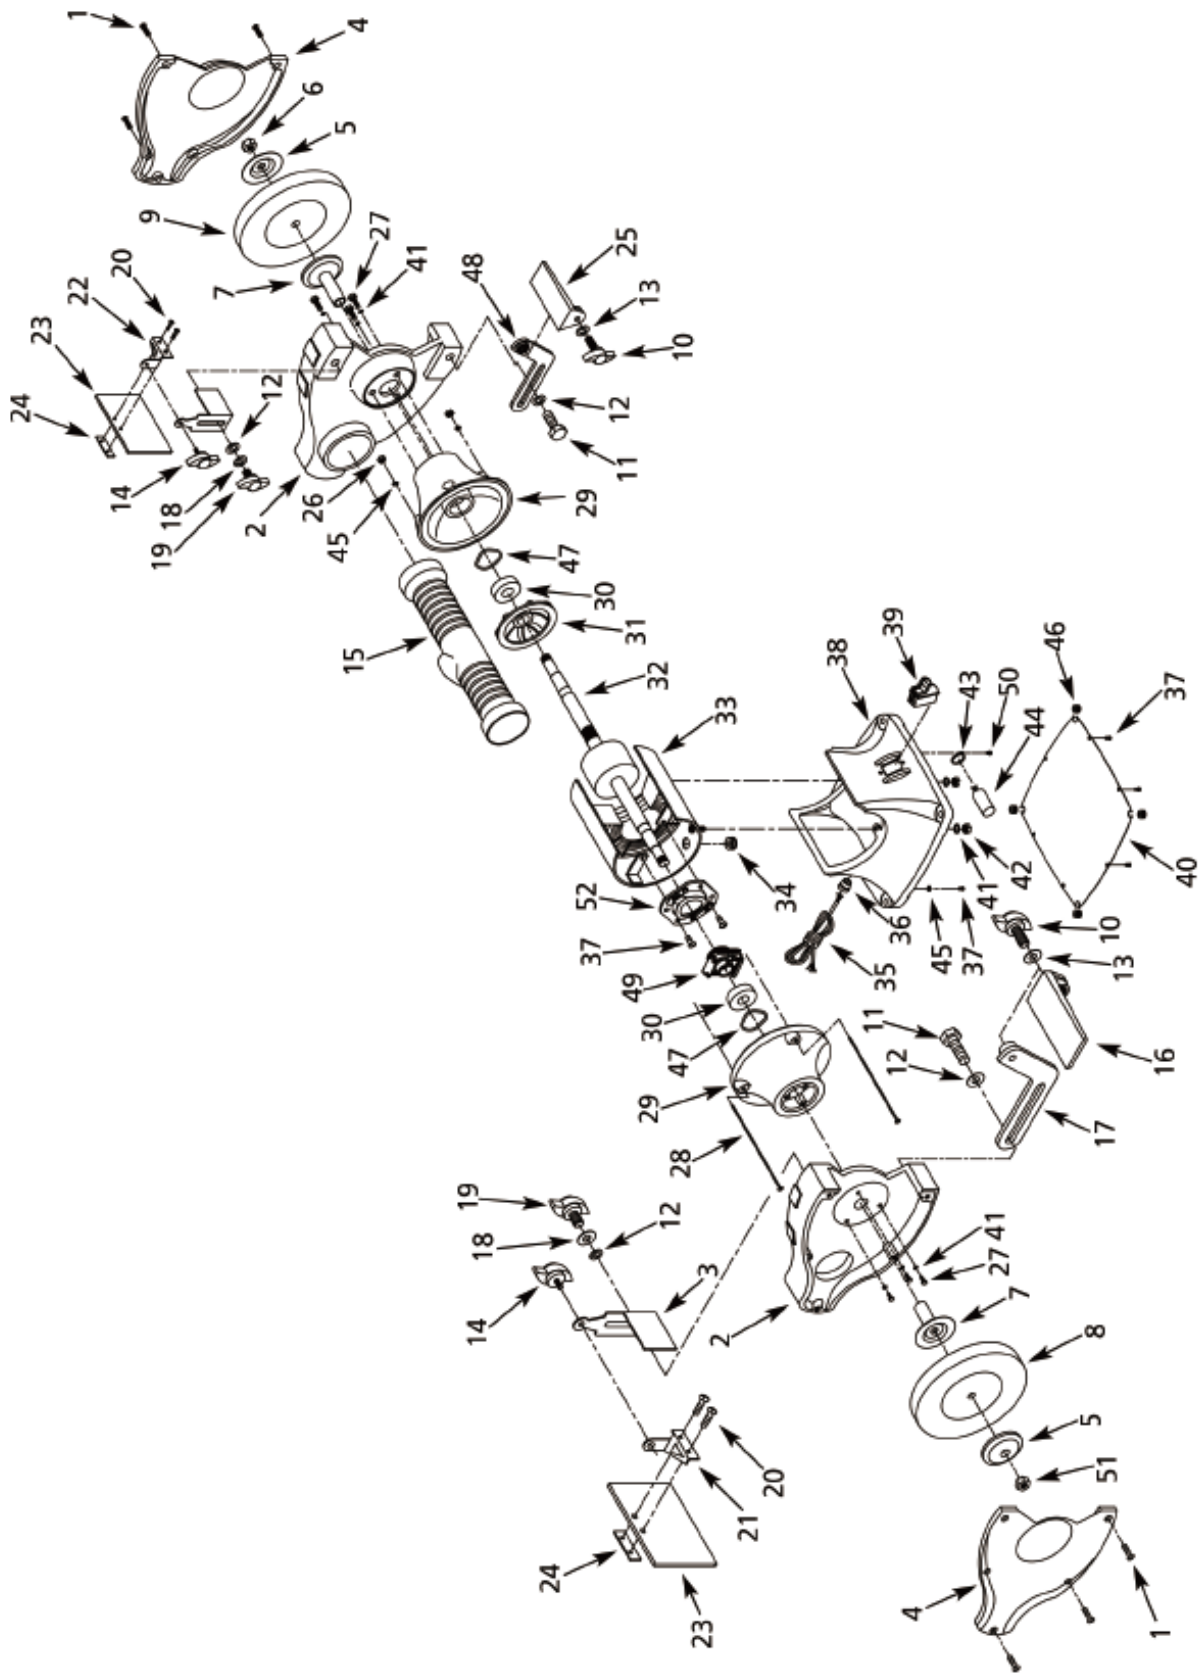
Repair Parts Illustration for 7 and 8" Bench Grinders
